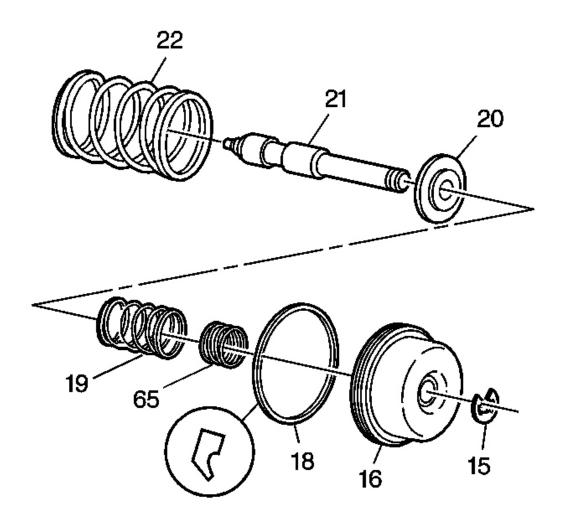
Identifying Servo Piston & Components Courtesy of GENERAL MOTORS CORP.
